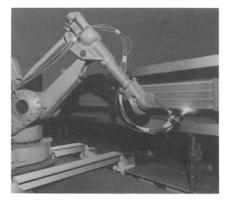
For the first time, metallic surface coatings can be deposited with SmartArc using a robot mounted arc wire spray gun
